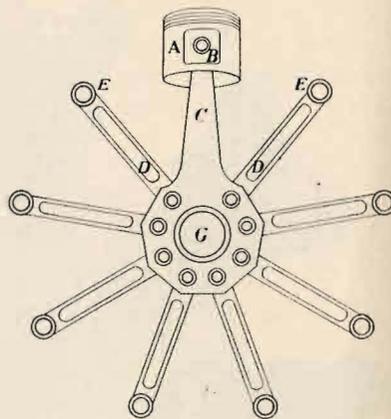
Connecting Rod Assembly of Radial Engine. A, piston; B, piston pin; C, master rod; D, link rods; G, crank.
